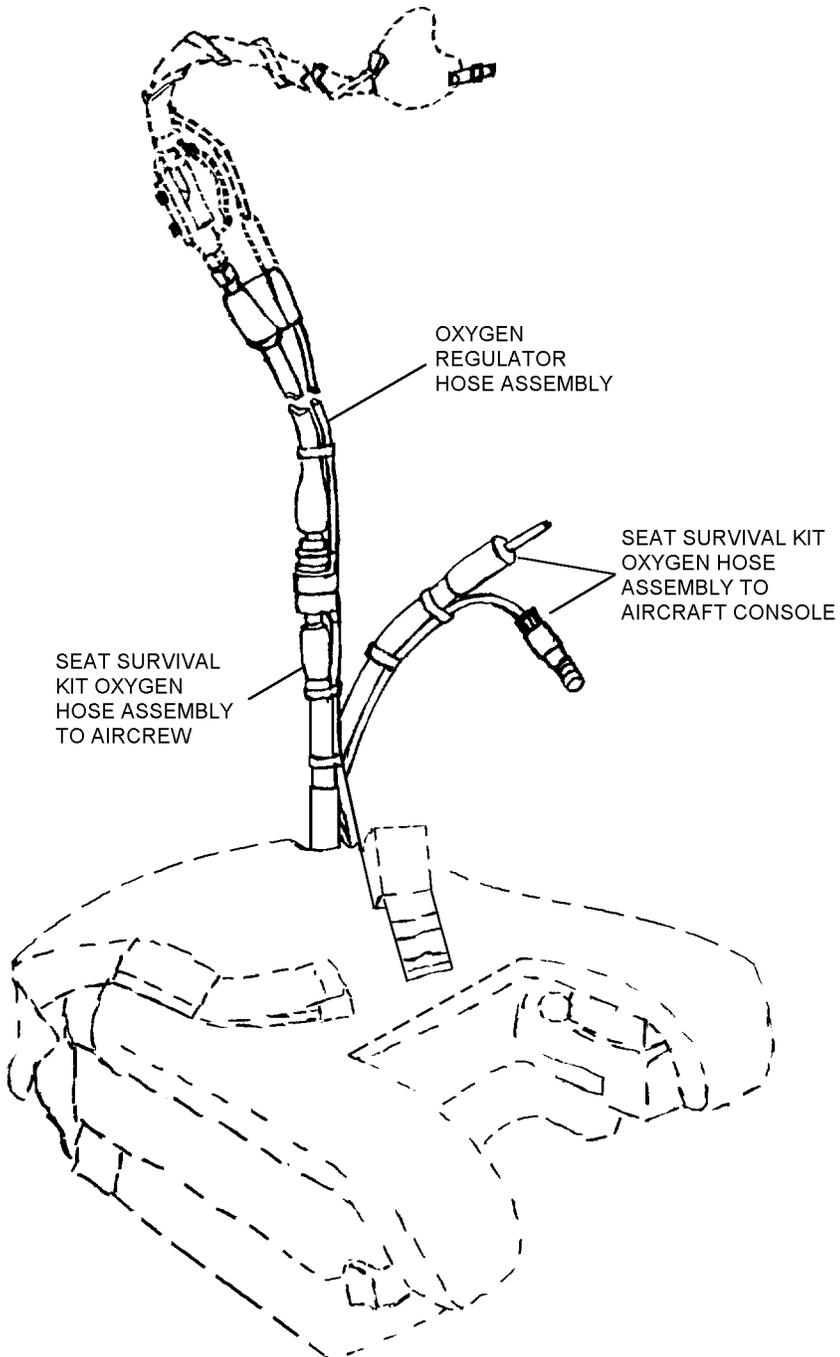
Oxygen Hose Assemblies Configuration (Typical)
